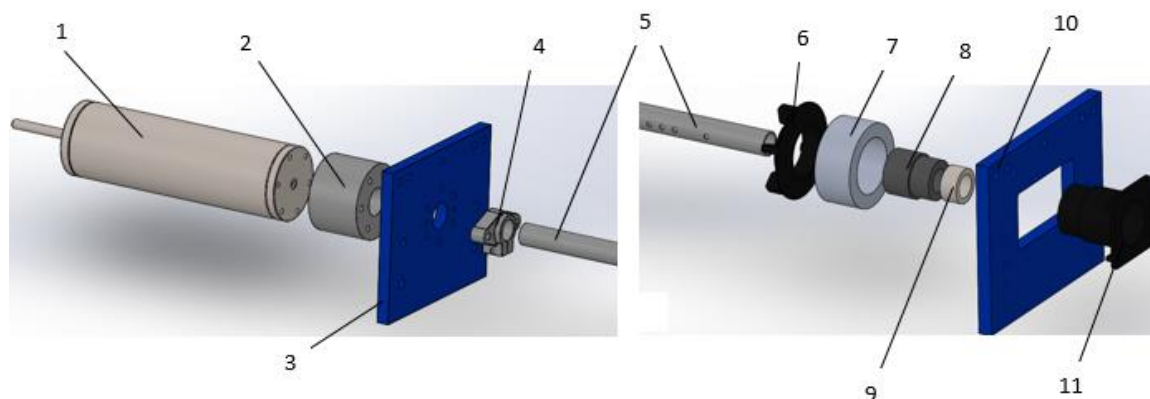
CAD model of the set of mounting parts of the pneumatic gun to the machine: (1) Air tank; (2) Tube holder; (3) Vertical board; (4) Tube retainer; (5) Tube; (6) Female hydraulic support; (7) Outer ring; (8) Inner ring; (9) Tube ring; (10) Vertical board with window; (11) Male hydraulic support.
